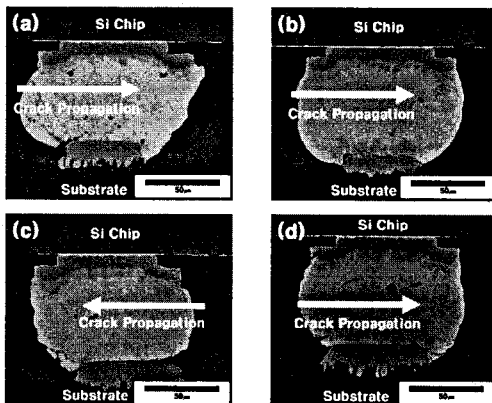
Cross Section of Sn-2.5Ag solder bump after the Flip Chip thermal Shock test
